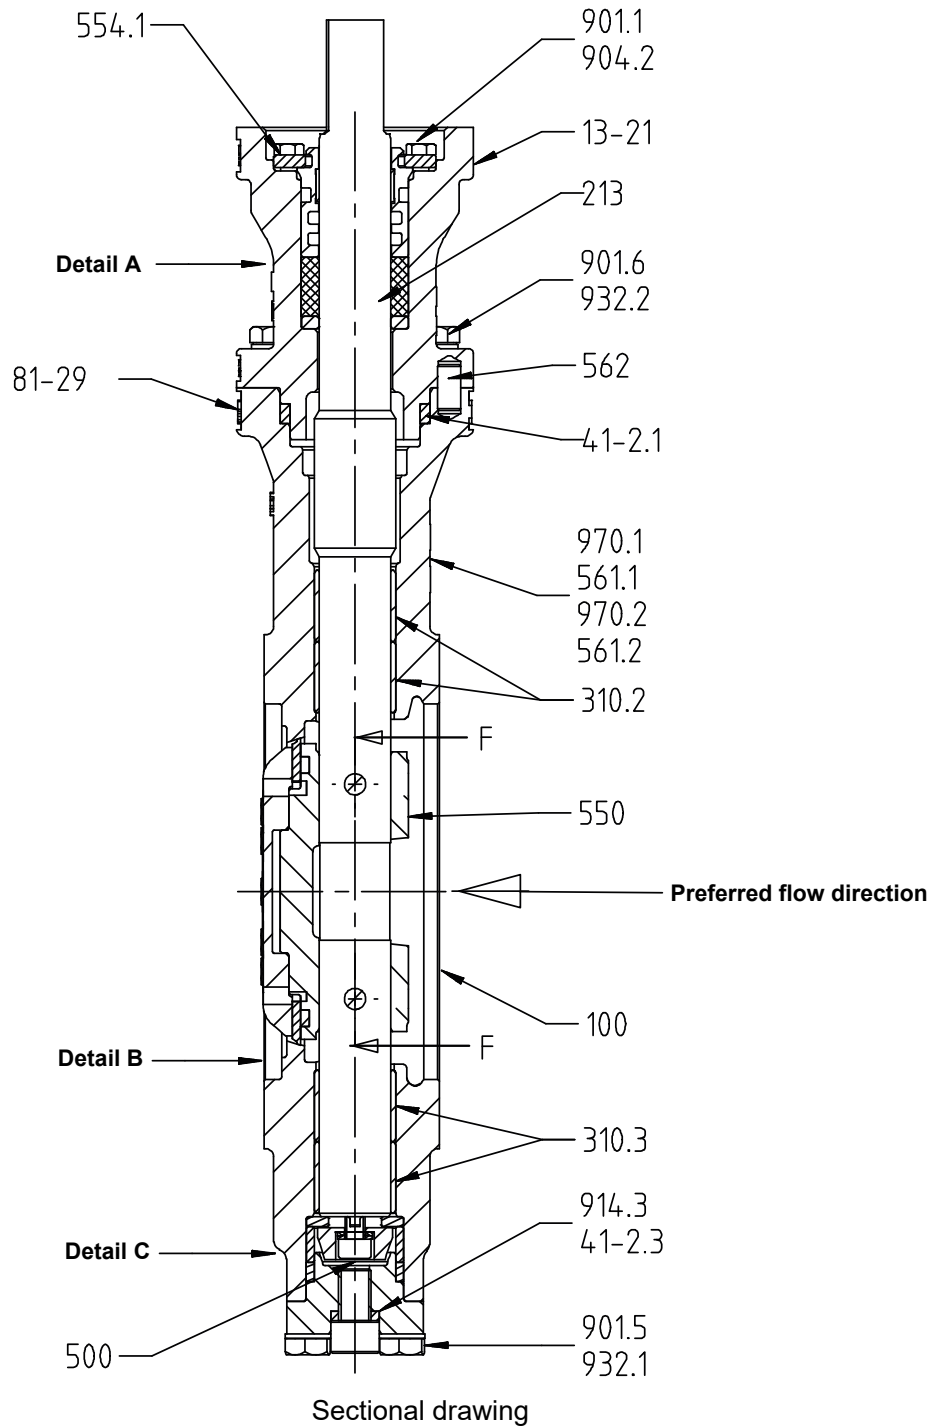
Sectional drawing of TRIODIS 300 MT T4 and T7 for DN 100 (4 in.)
